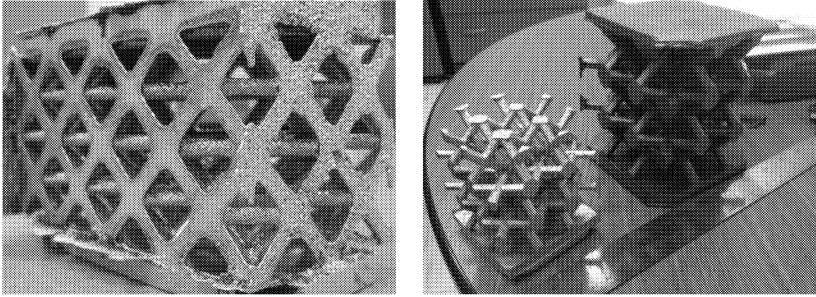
Complex, cellular structure castings produced from 3D binder jetted sand molds.
